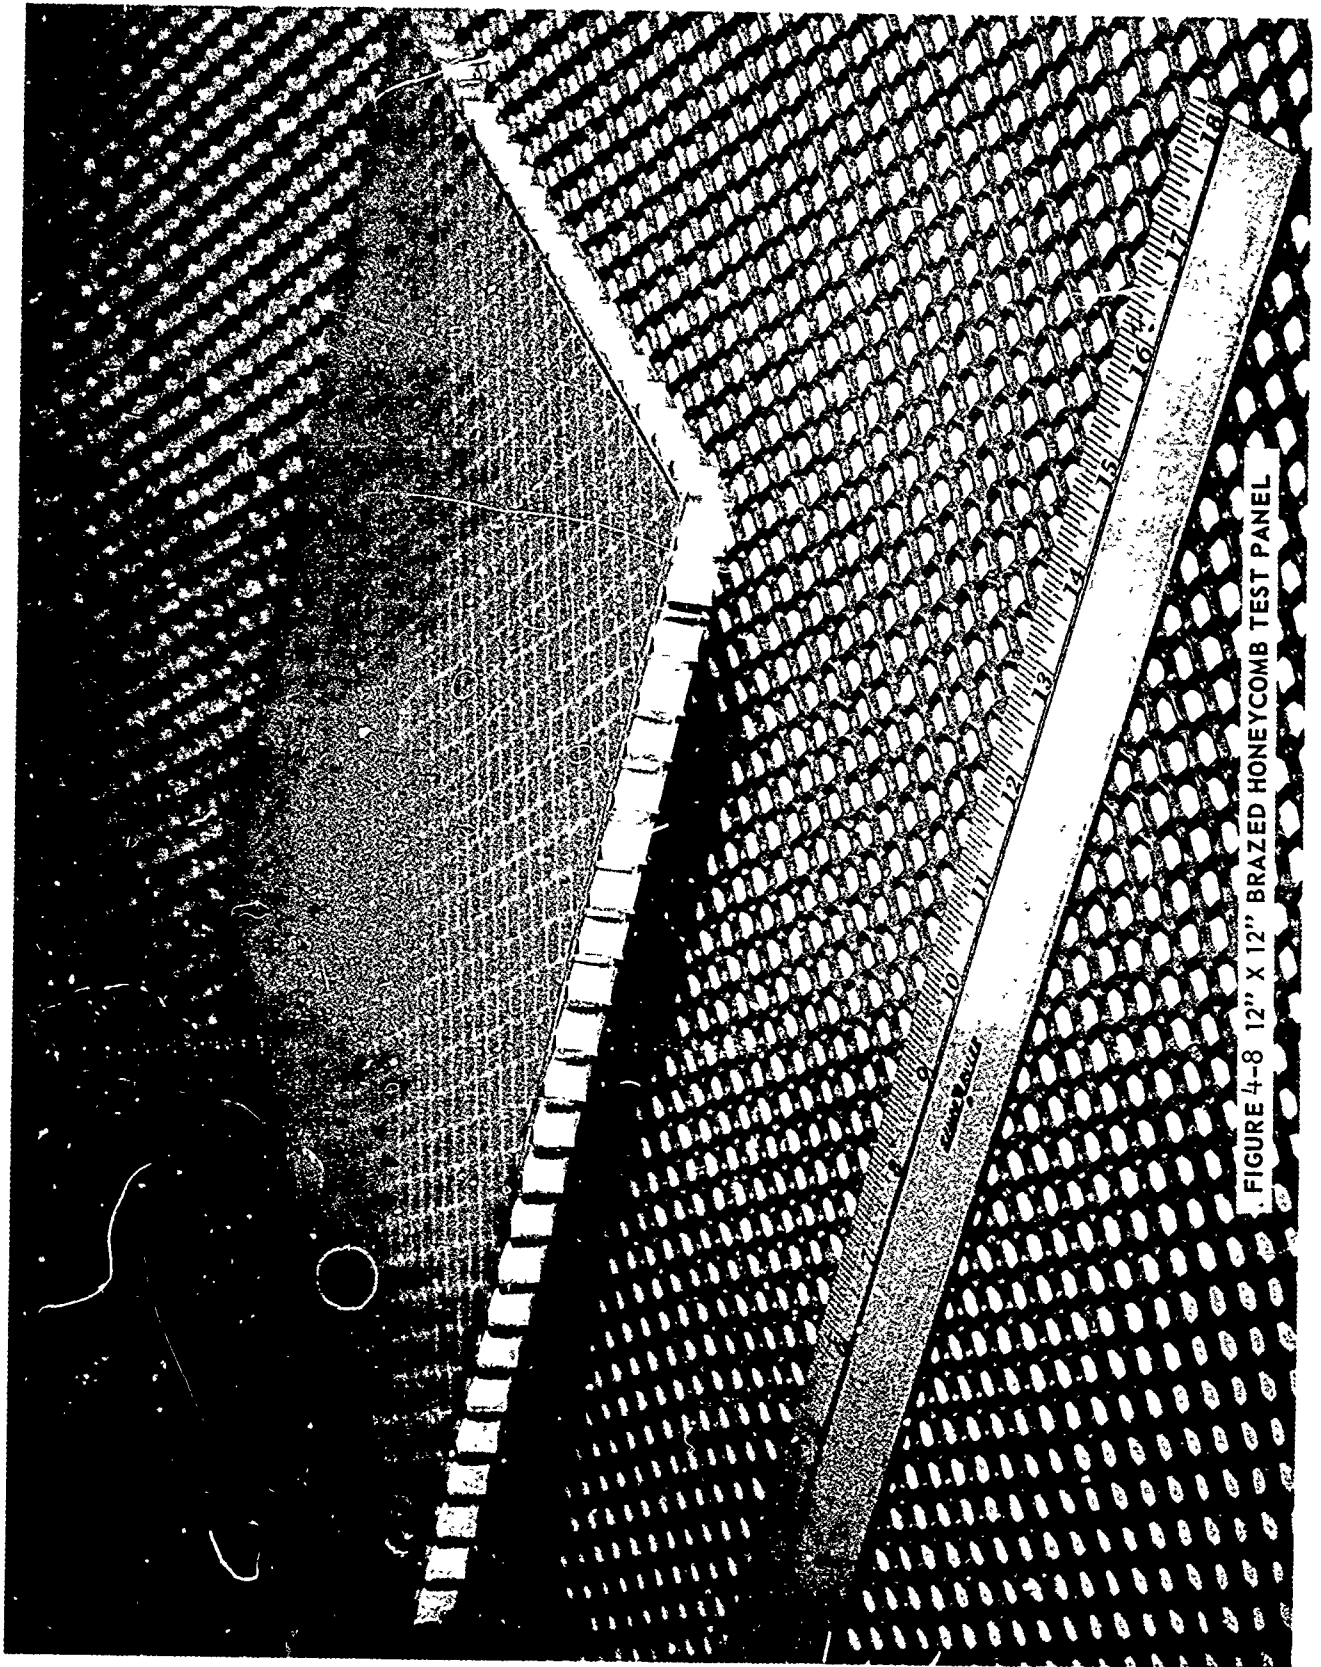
12" X 12" BRAZED HONEYCOMB TEST PANEL
